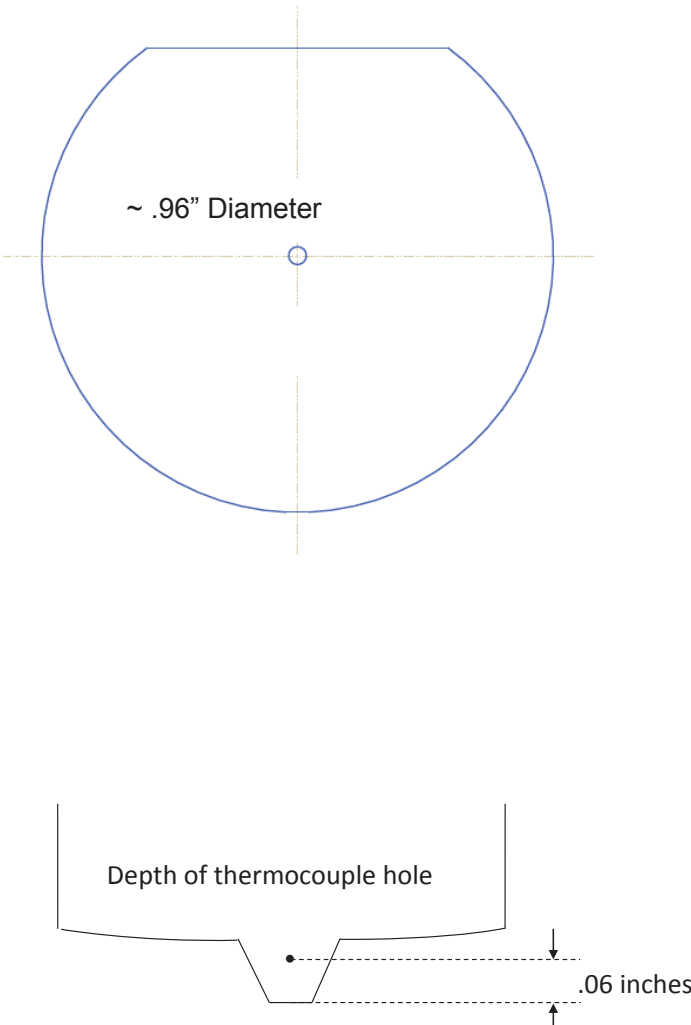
This Figure shows the depth of the thermocouple hole in the CS4 tool used for the aluminum relay and temperature welds.
